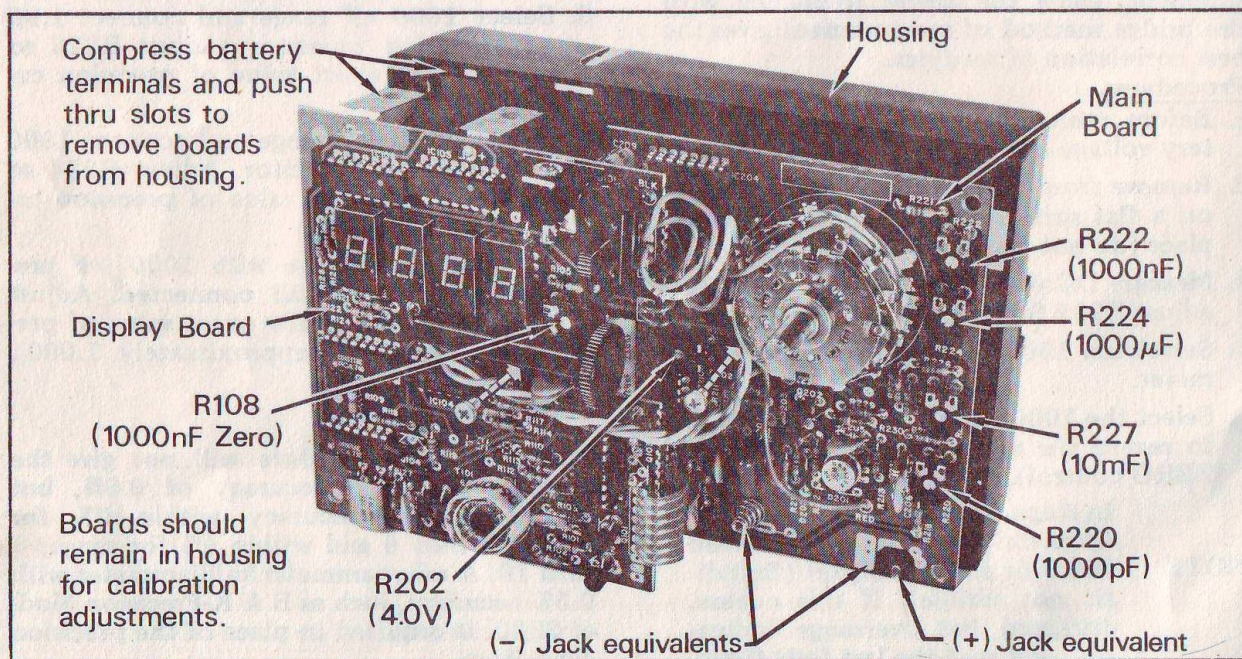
Location of calibration adjustments, and removal of boards from housing.
